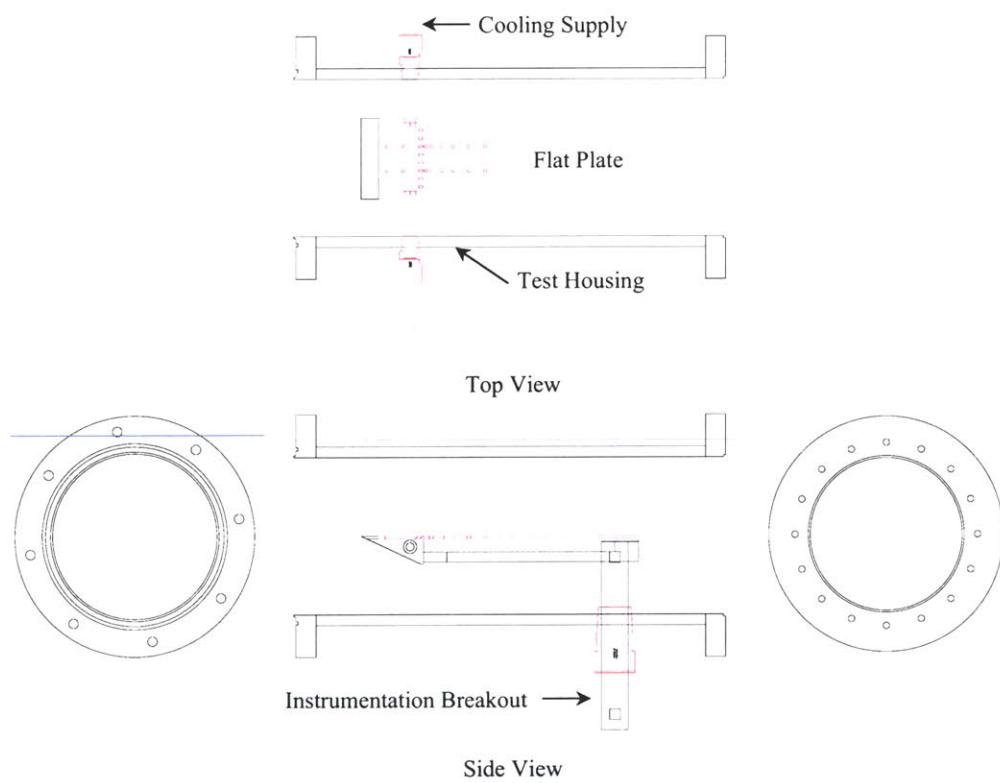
Top and Side Views of Flat Plate and Test Housing Assembly
